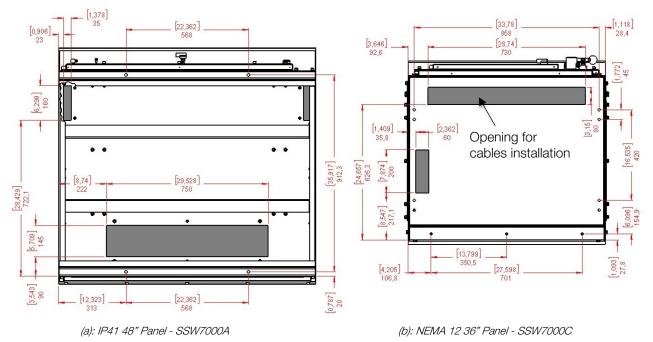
(b): Anchoring of the SSW7000 panel to the floor – dimensions in mm [in]
